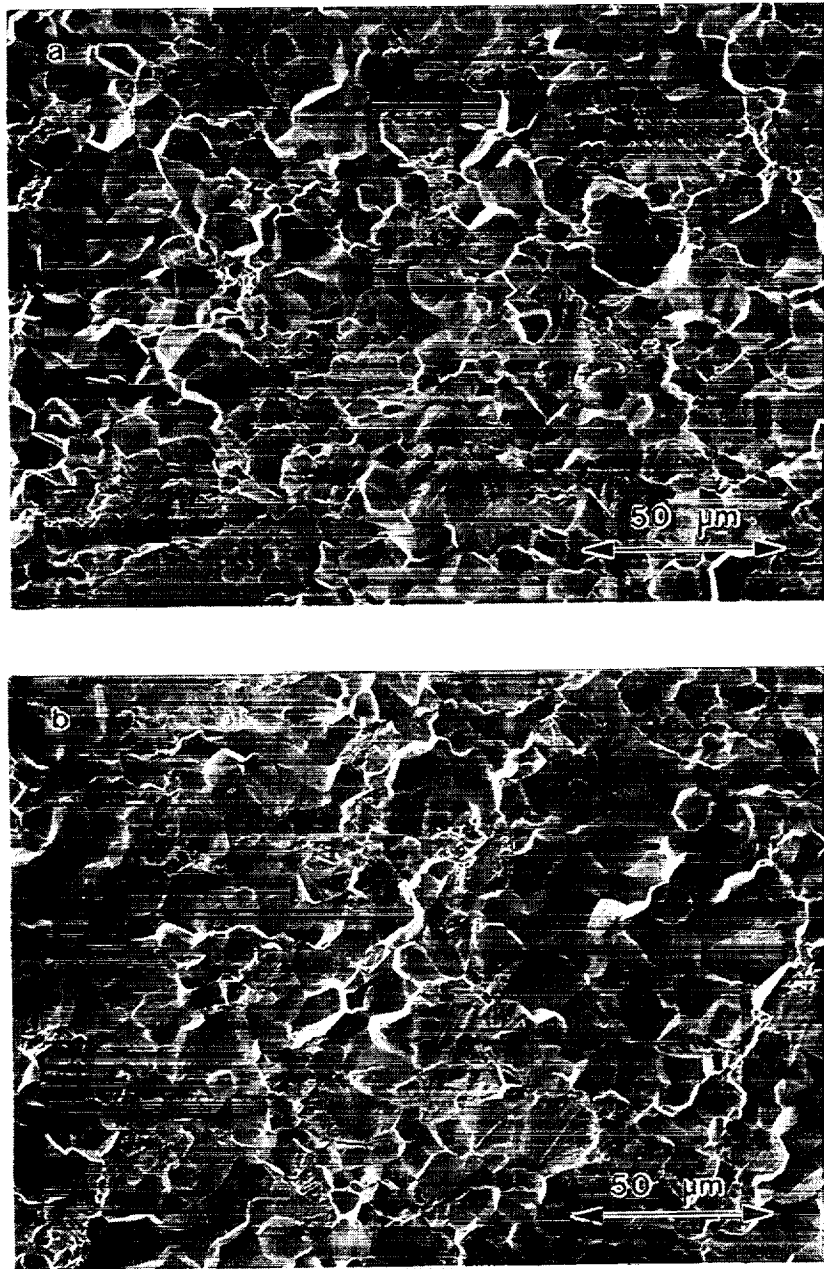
Fracture surfaces of powder extruded tensile samples tested after electrochemically removing: a) 75 μm of surface material from the gauge and b) 220 μm of material from the gauge surface.
